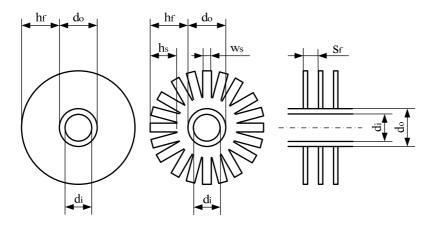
Schematic overview of the fin types and geometry parameter; left: solid-fin tubes, middle: serrated-fin tubes, right: view from the side
